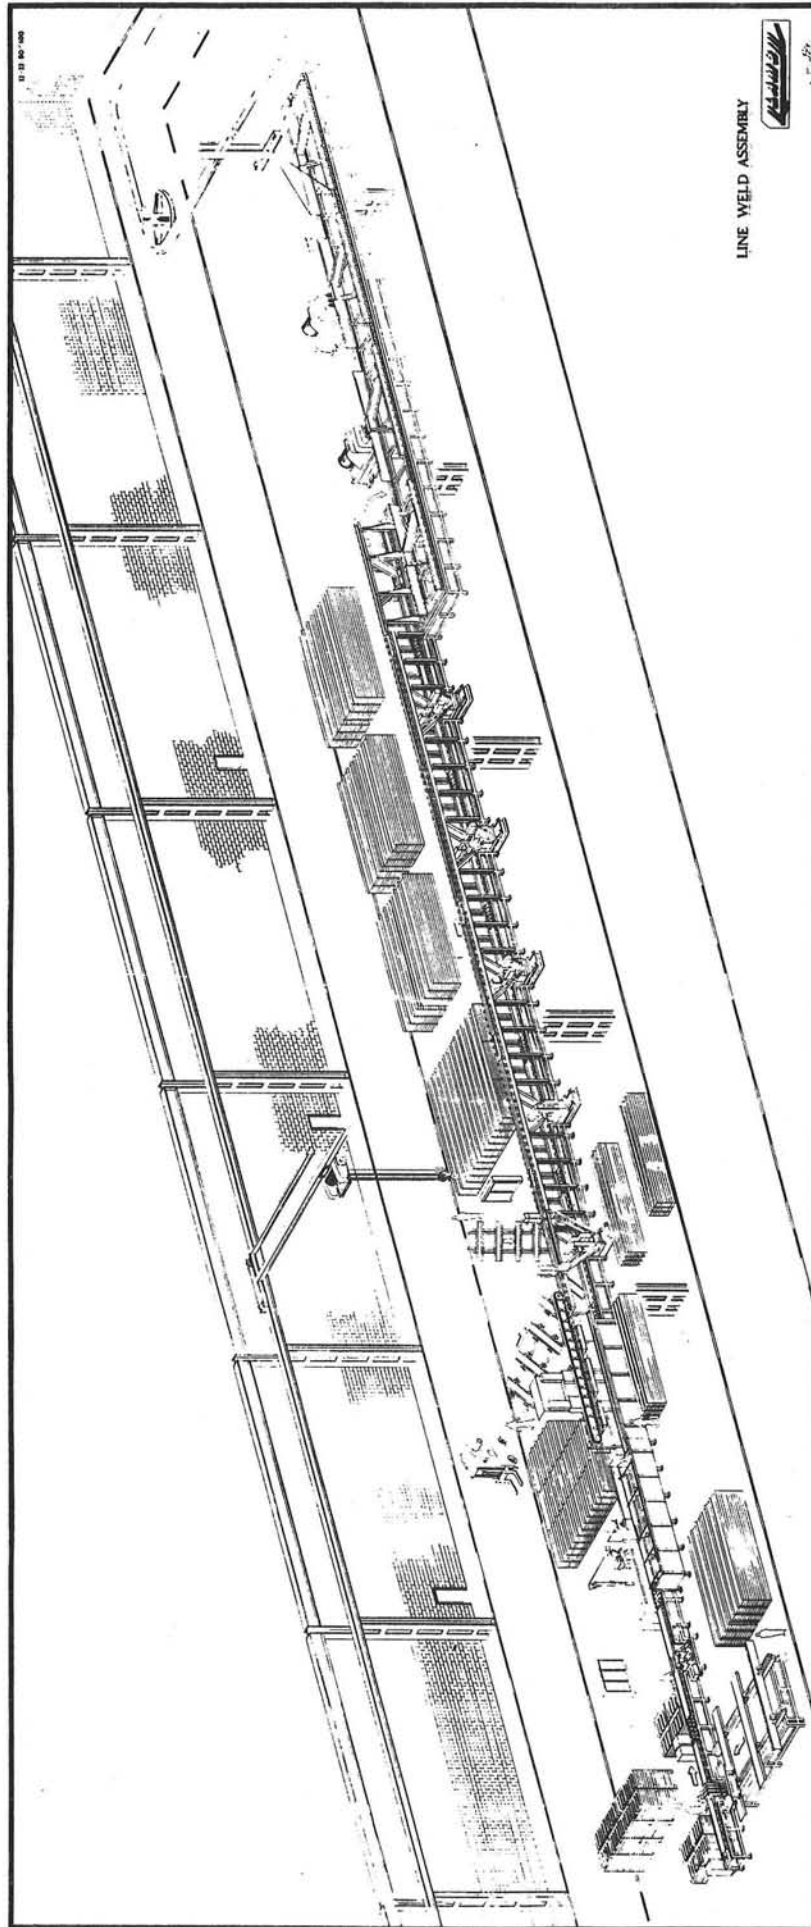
LINE WELD ASSEMBLY
